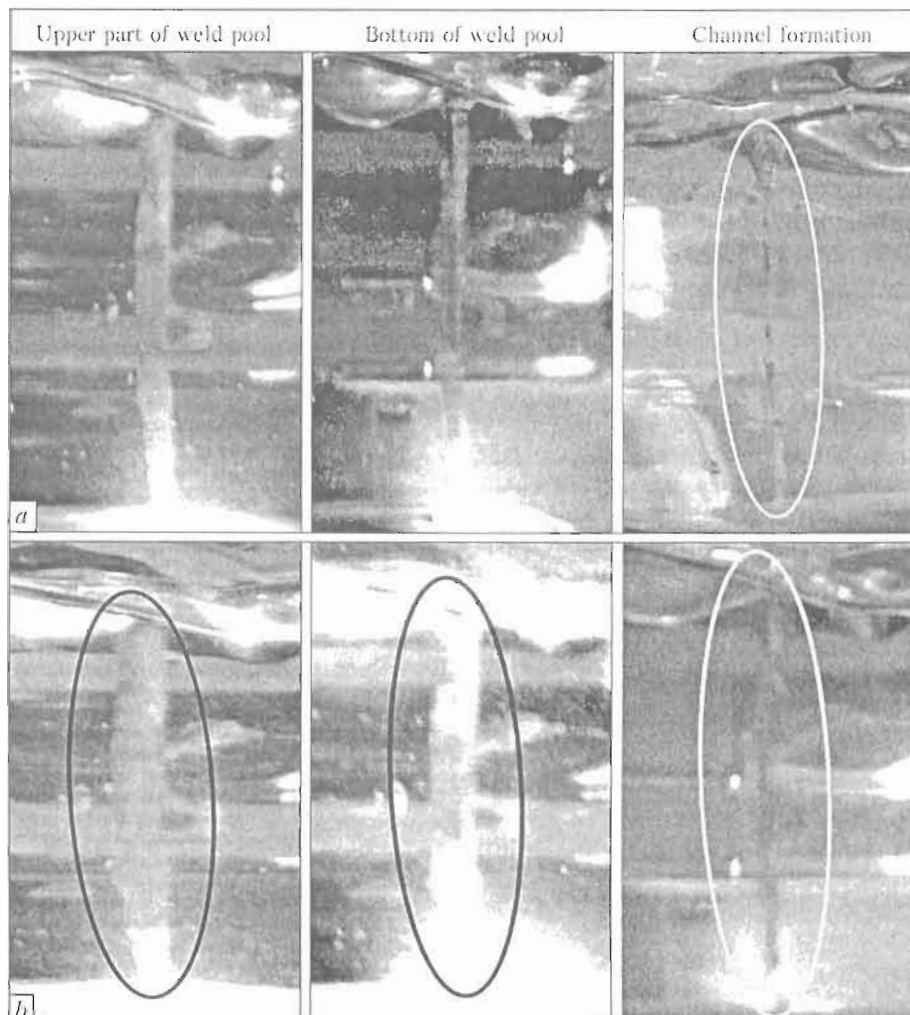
Hydrogel workpieces welded using CO $_2$ -laser at pulse pumped power 0.5 (a) and 1.0 (b) kW and $\tau = 0.5$ s
